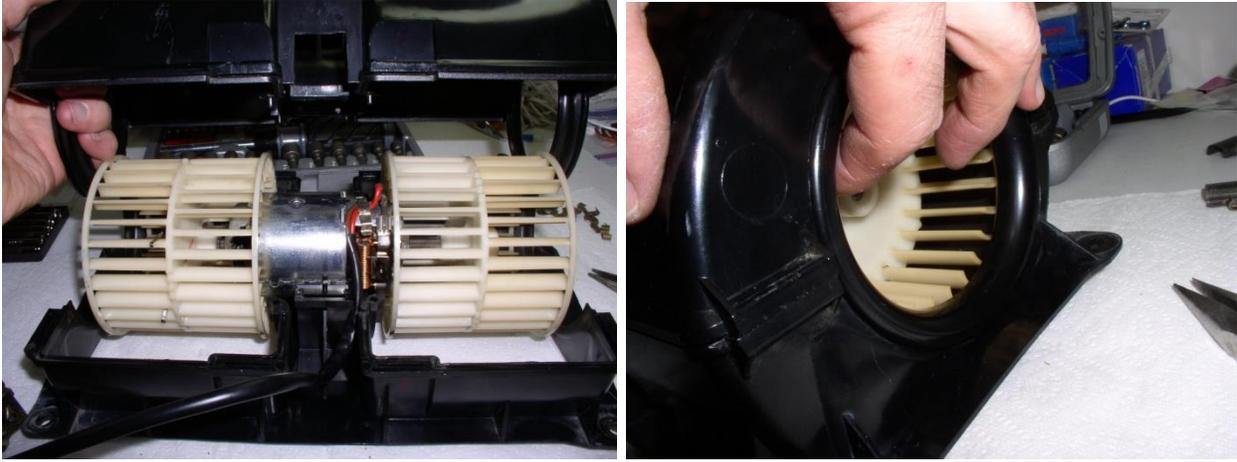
Lower the upper housing, carefully seat it, and check for binding by spinning the fan. Note both outer air guides and the upper halves of the two inner air guides are pre-installed in the upper housing.
